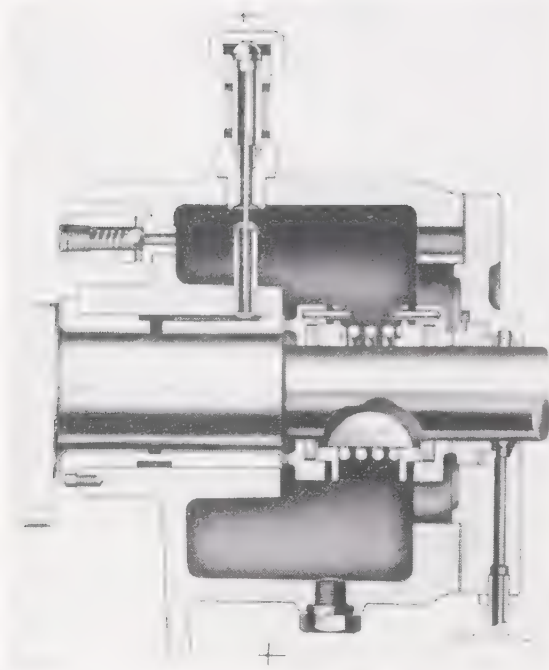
Rotary oil-seal for enclosed-type compressors. (Courtesy of Thomas Ths. Sabroe & Co.)
